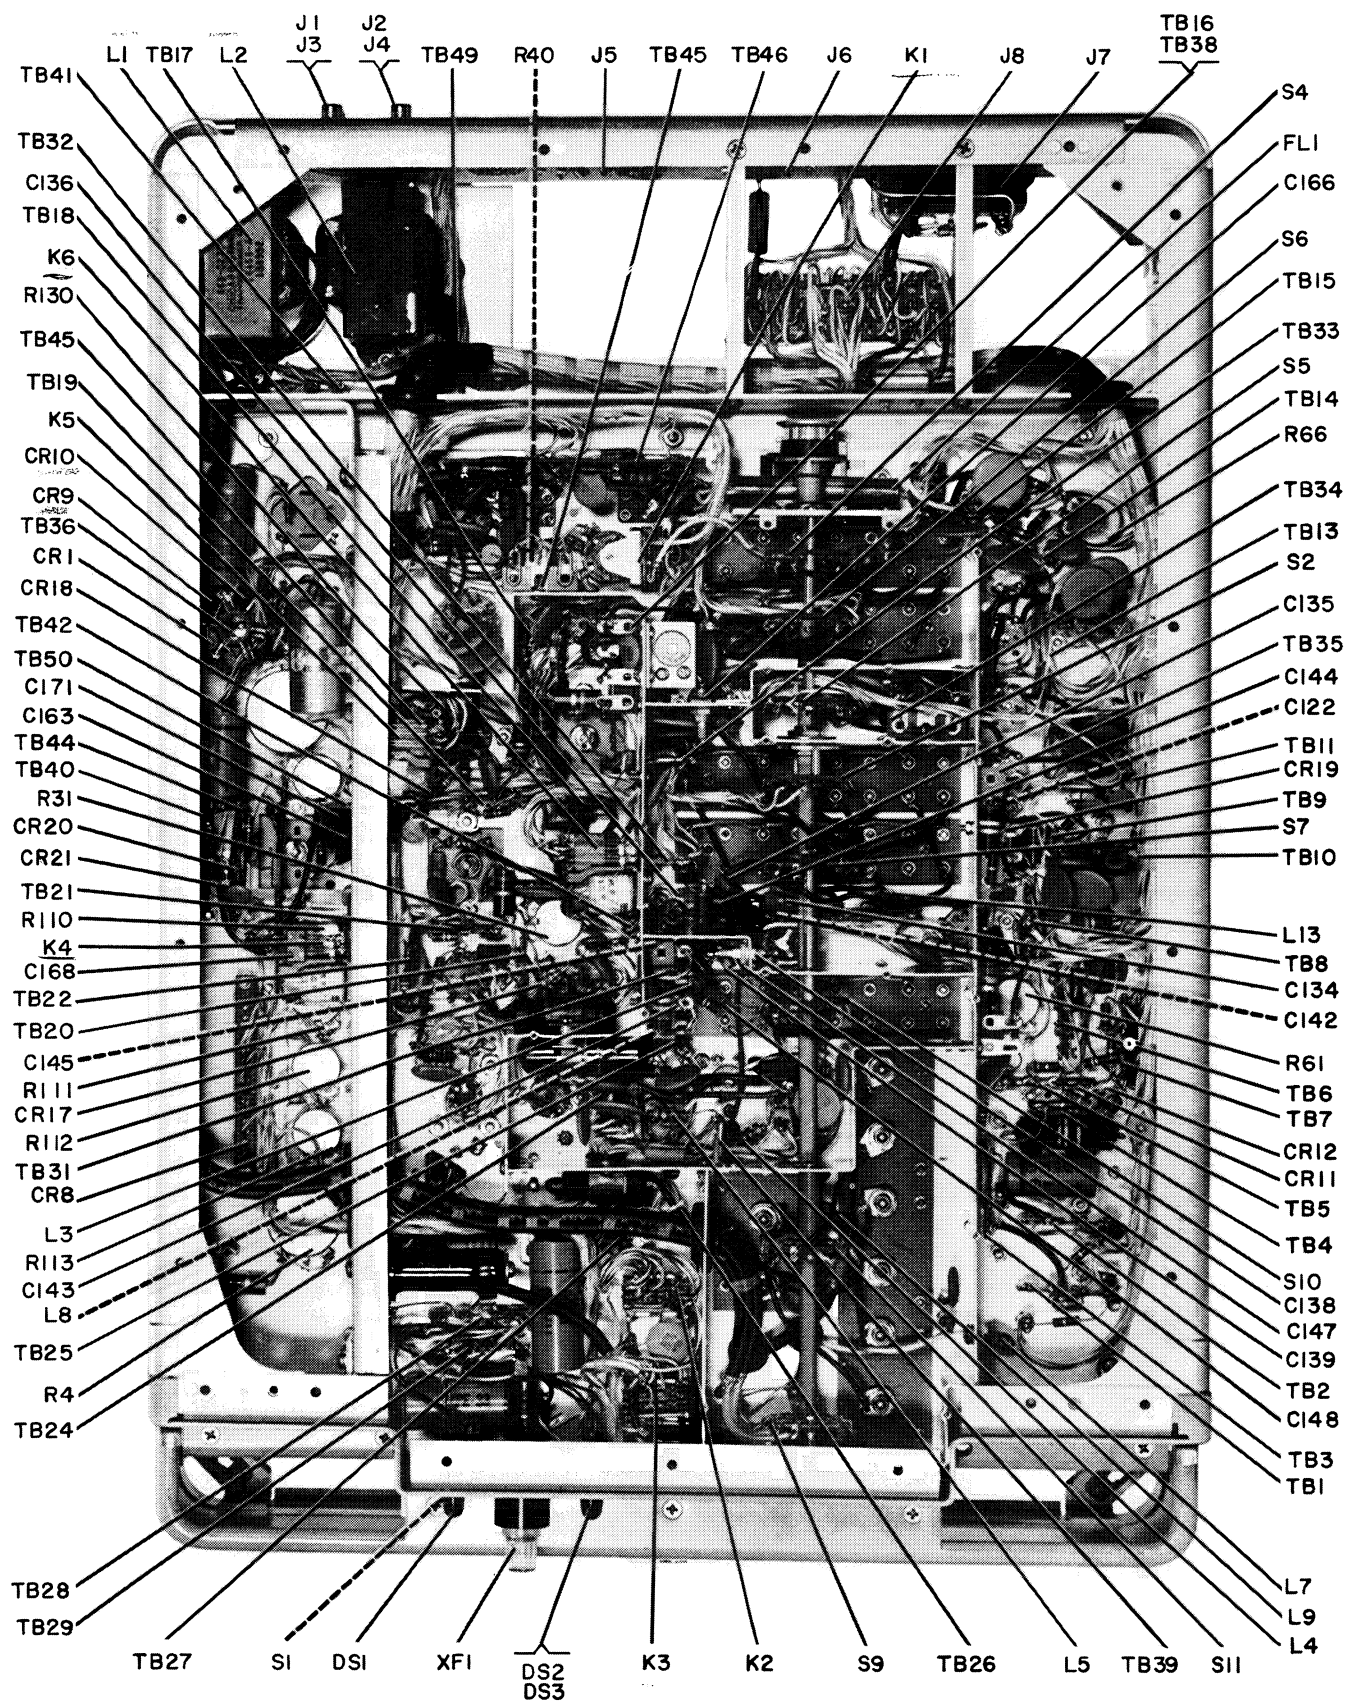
32MS-1A, Bottom View (C), Cover and Shield Removed, Keyed
